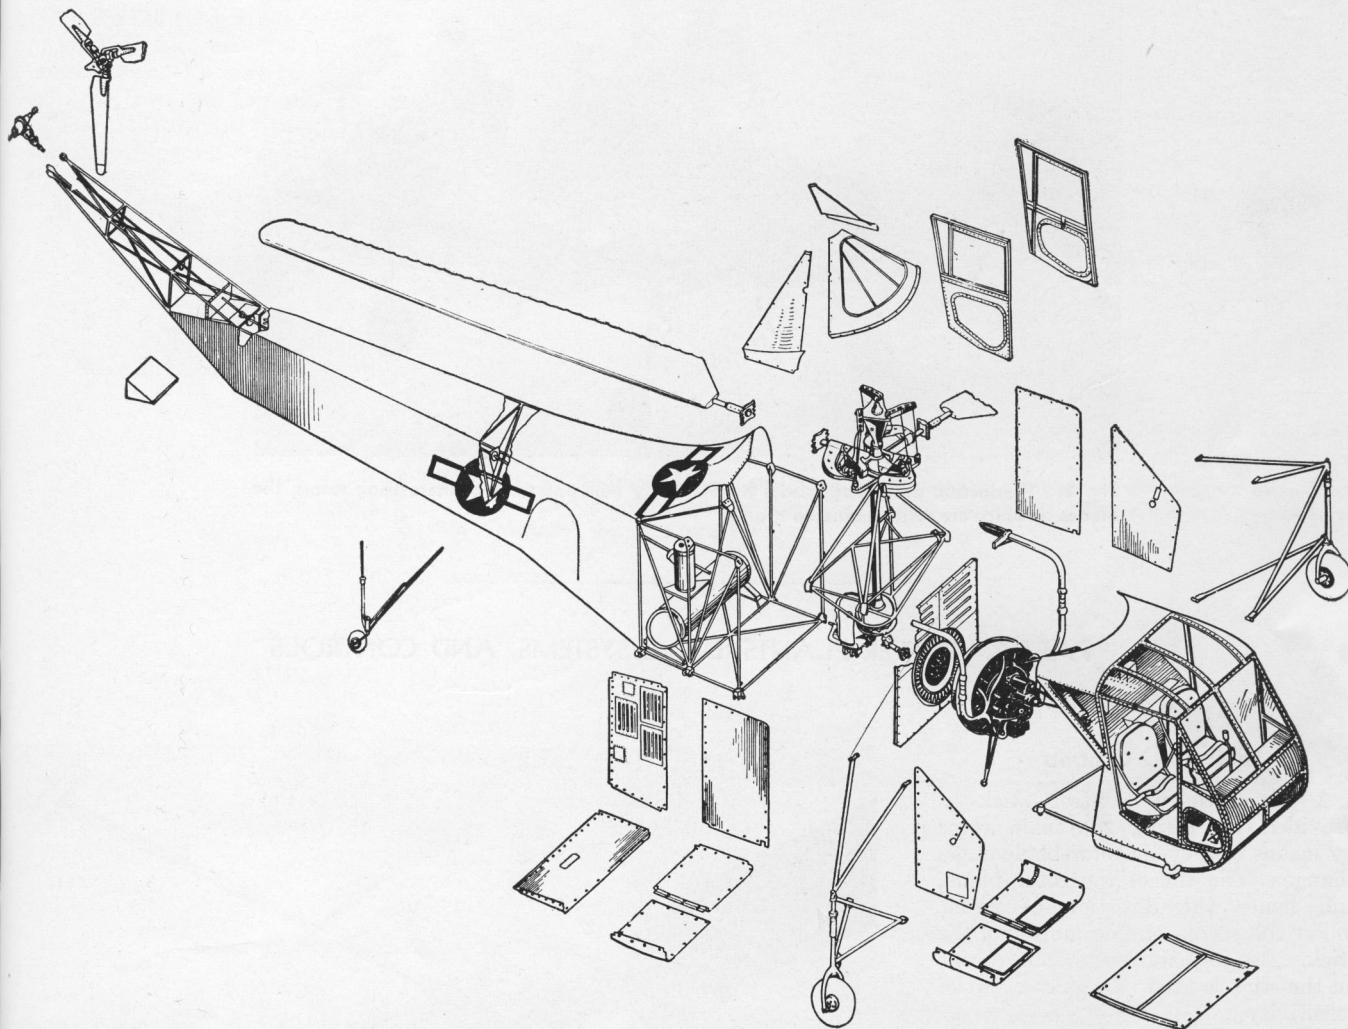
Exploded view showing the major components of the Sikorsky R-4 helicopter which was used by both the AAF and the Coast Guard during the Second World War.
